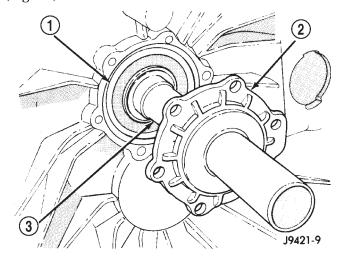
Input Shaft Bearing Retainer Removal— Typical
